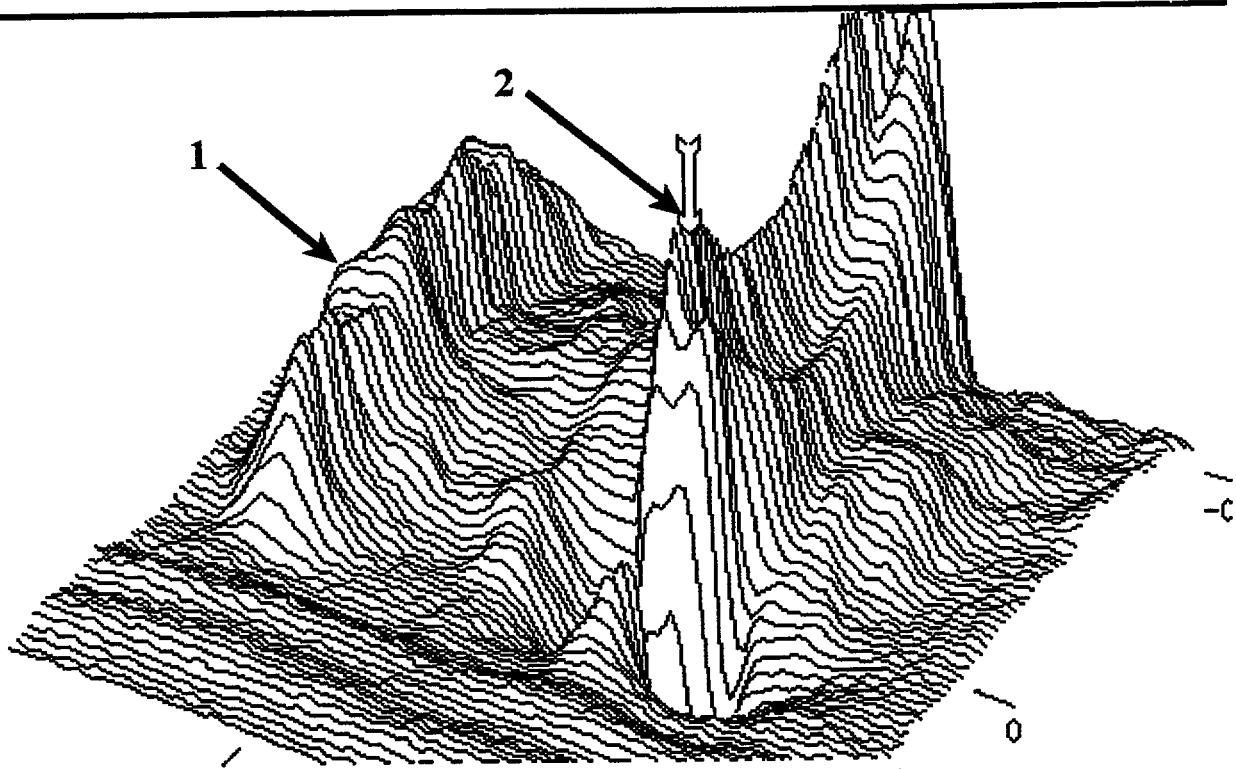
Profile of crack 3 in tube r34c51 of Steam Generator 22.
